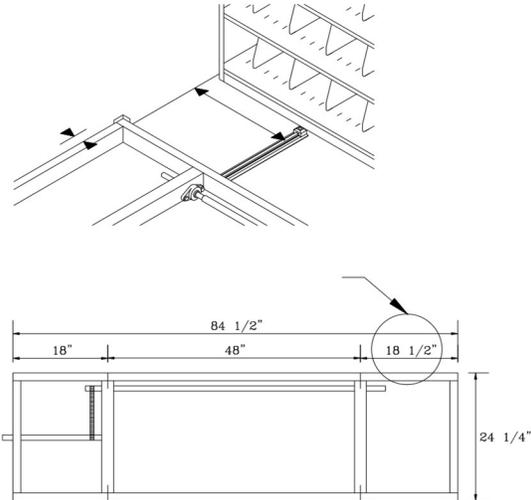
Find rear cantilever dimensions on production drawing and add 2" for clearance - usually 20 1/2"
